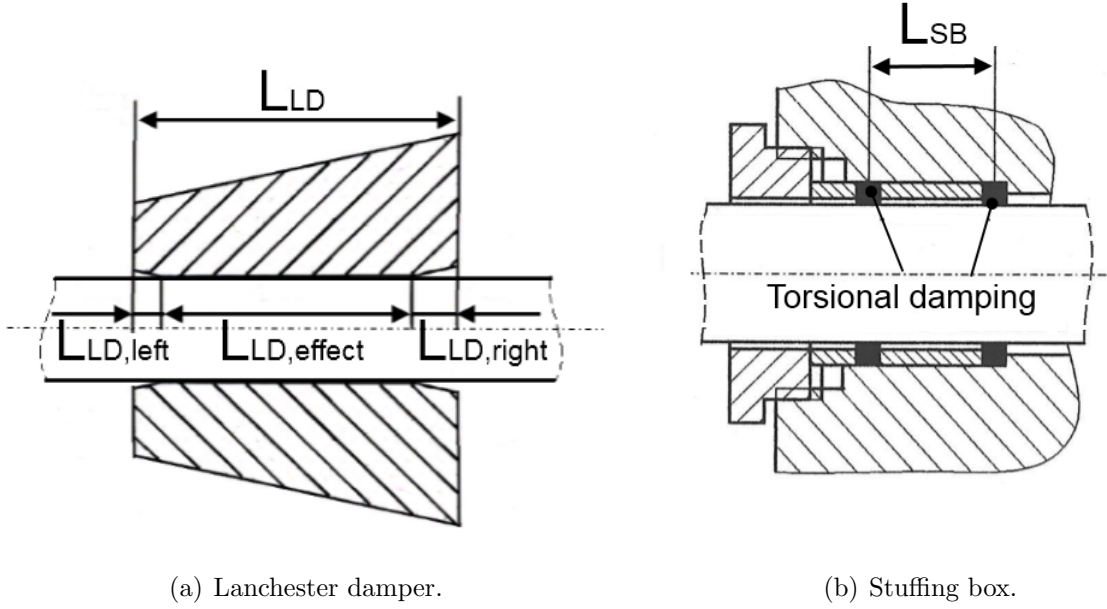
Models of Lanchester damper and stuffing box [18].
